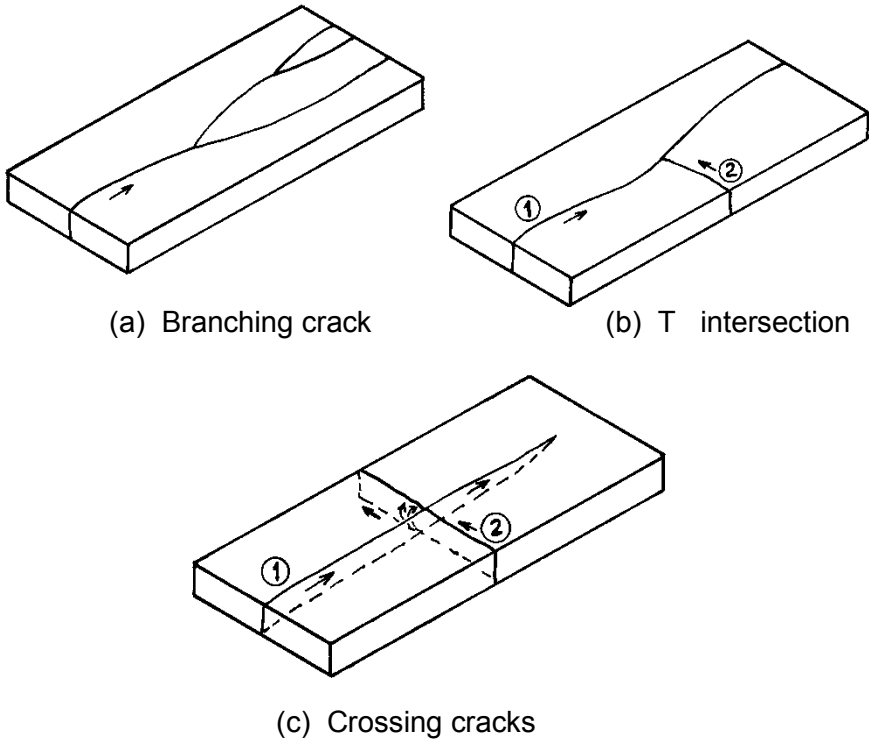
Intersecting cracks. (a) shows common crack branching, which can be distinguished by the gradual forking. (b) shows a T intersection. The numerals indicate the first and second cracks. (c) shows a crossing crack, which may occur if the first crack does not completely cleave the part.
